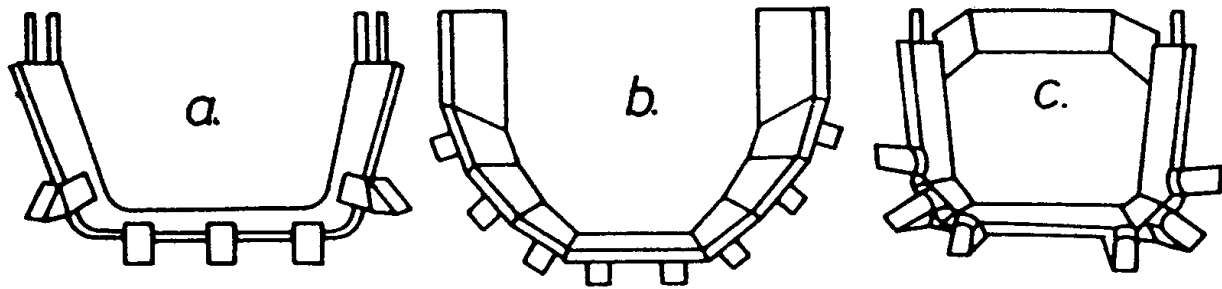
Exemplary ways of shaping the cutting edge of the bucket [3]:
